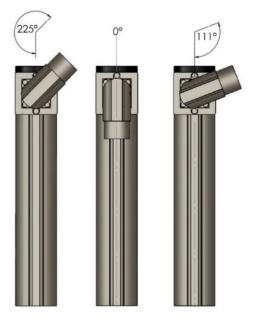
Setting the C-motor connector (PDL30/40 modules)
